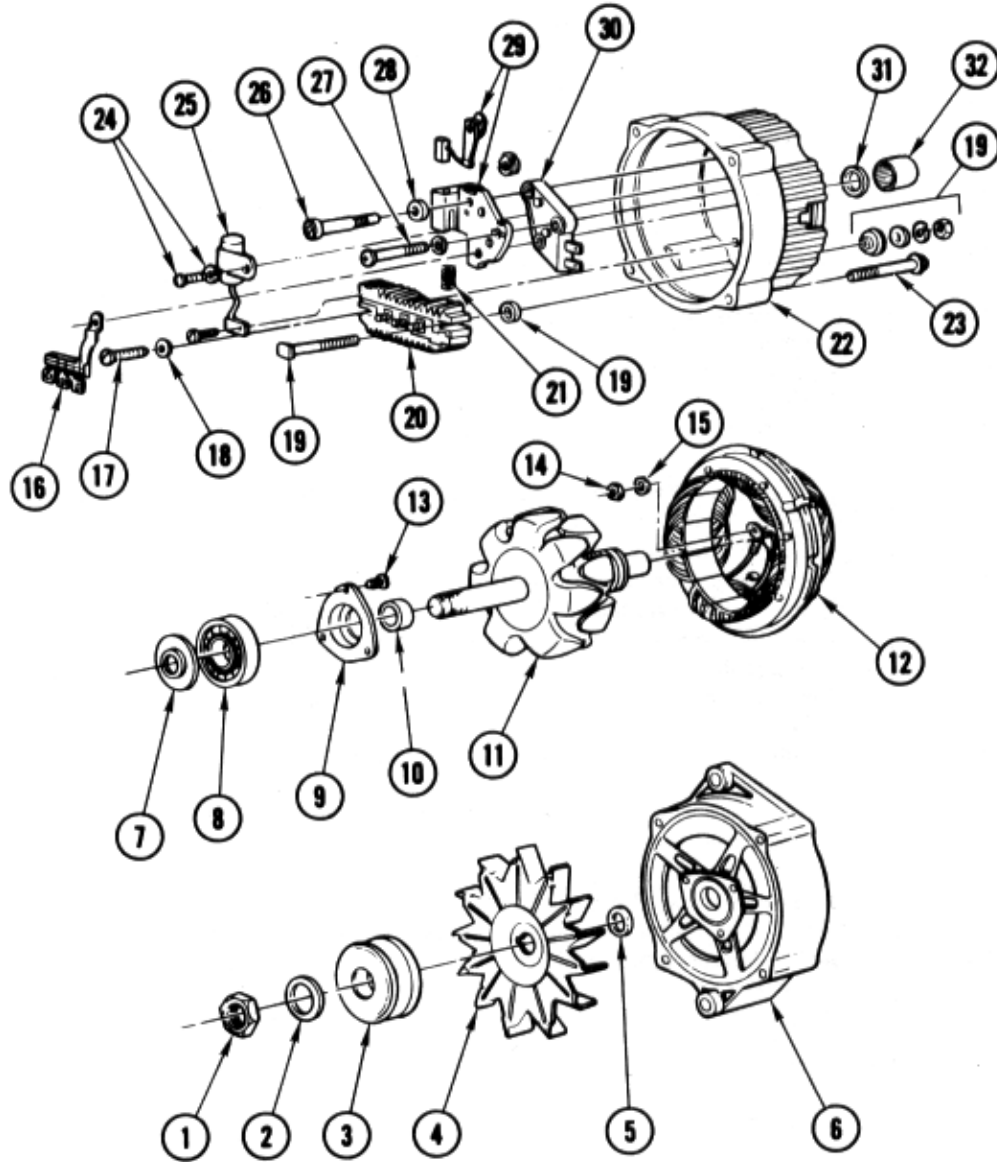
Generator Assembly. 6 & 8 Cylinder
